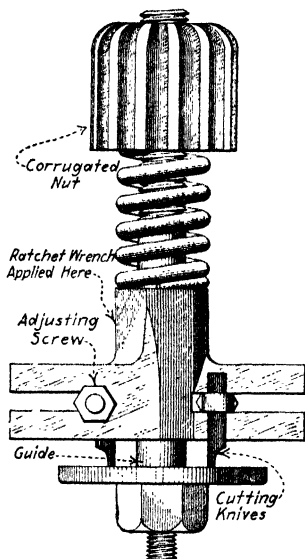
The "Jiffy" adjustable cutter. (Distributed by Koch & Sandidge, Chicago, Ill.)
